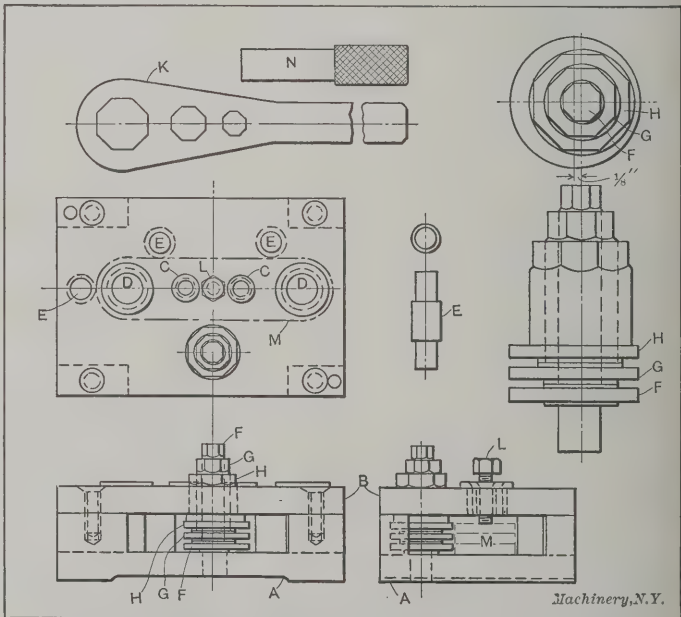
Jig equipped with Unique Type of Eccentric Clamping Device
